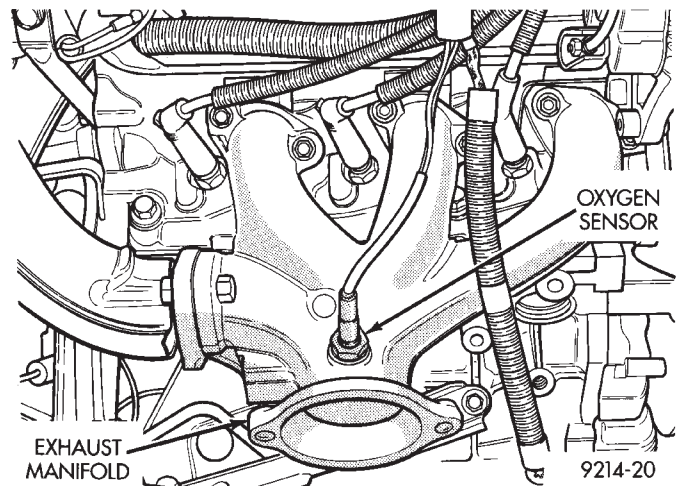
Heated Oxygen Sensor—3.3/3.8L Engine
